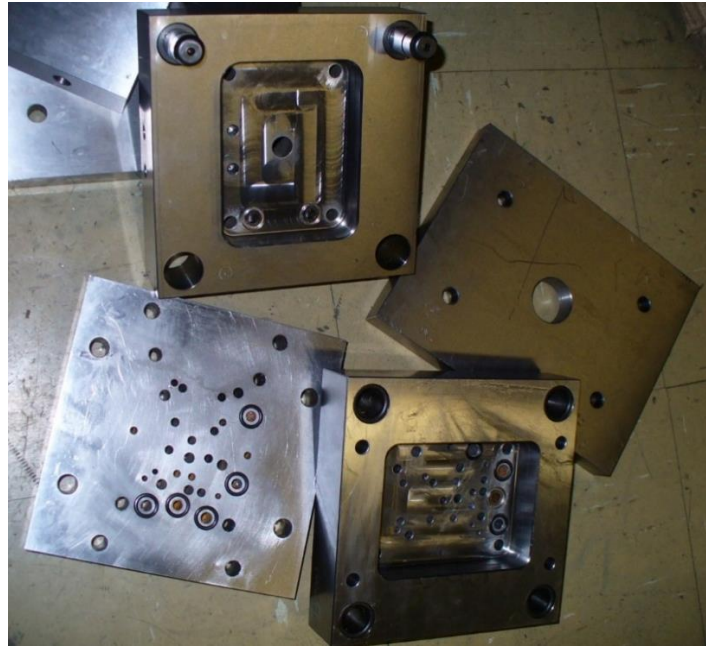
Mould components of the steel bolster with machined pockets, O-ring grooves and ejector pin holes.
